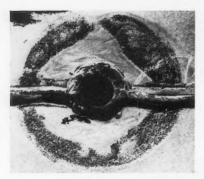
Intergranular attack of Type 316 in heat affected zone of poor nozzle weld.
